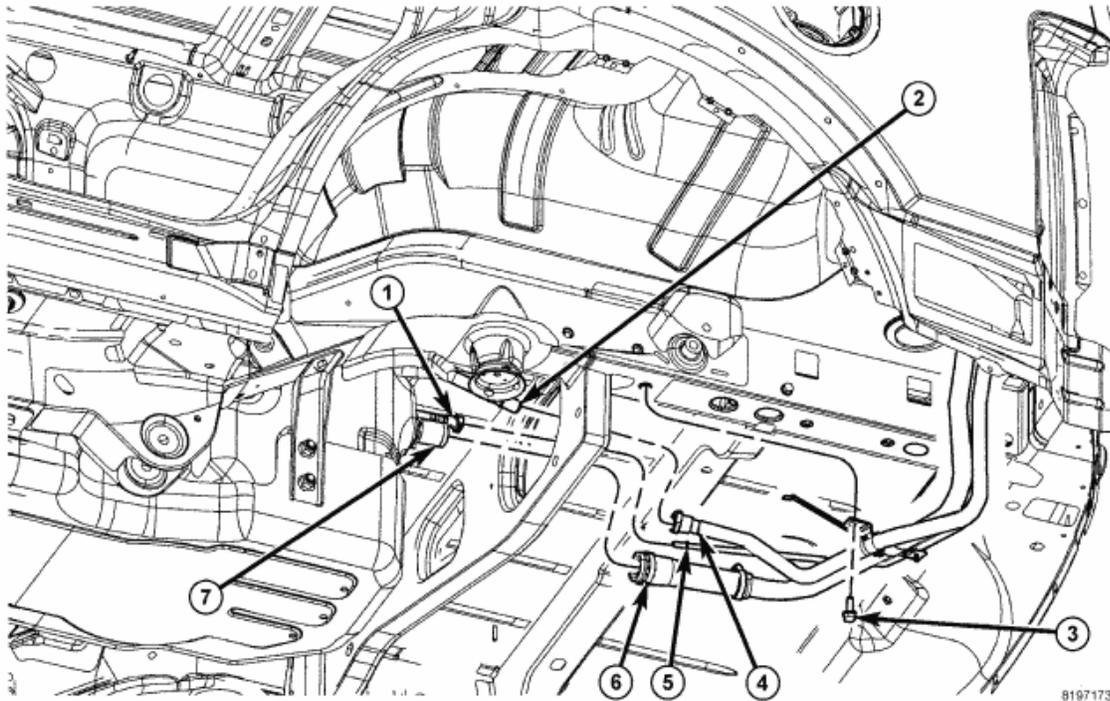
Disconnecting/Connecting Vapor Lines And At Rear Of Tank & Fuel Fill Hose And Clamp At Rear Of Tank
